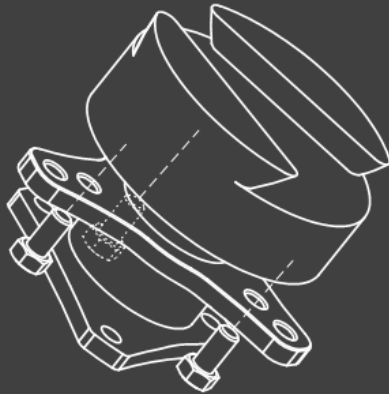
attaching the steering wheel hub to bases or quick releases that have threads
